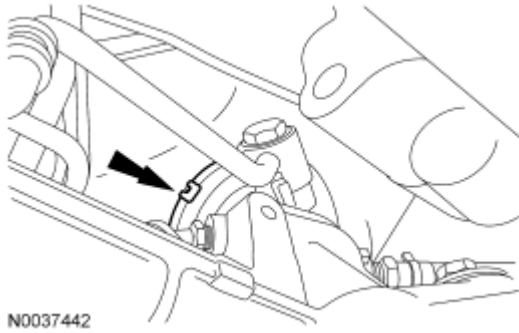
Locating Steering Gear-To-Dash Seal Clips
